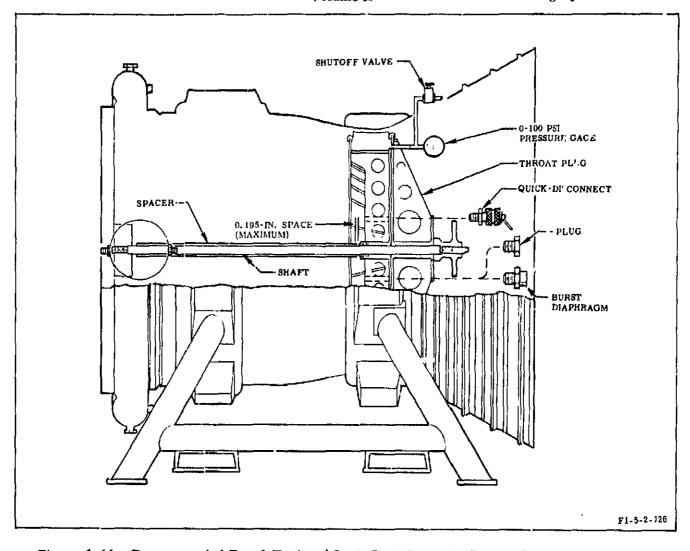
Recommended Proof-Test and Leak-Test Setup for Thrust Chamber Throat Plug
